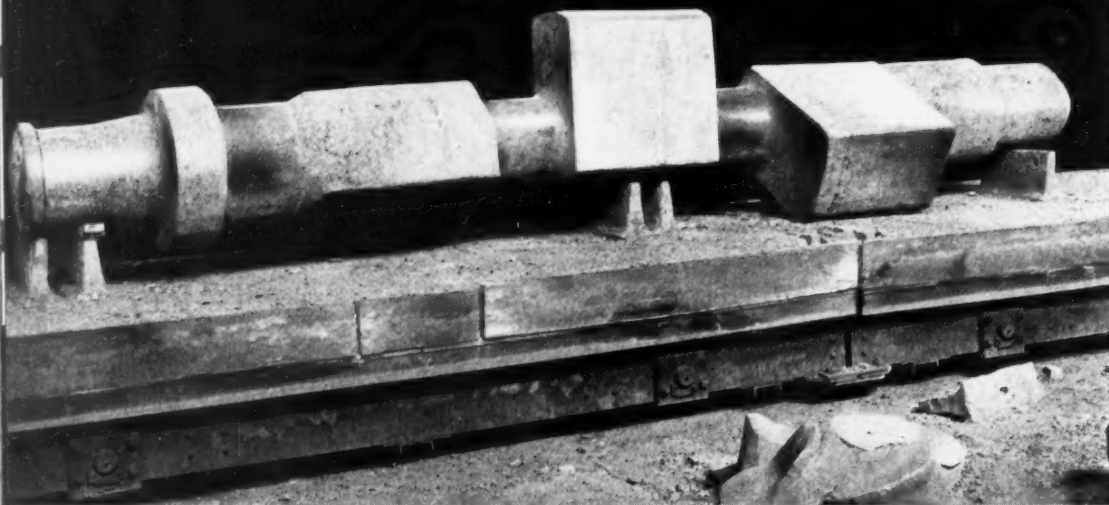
A Three-crank Crankshaft after the Twisting Operation, Lying on a Flat Car Ready for Annealing
